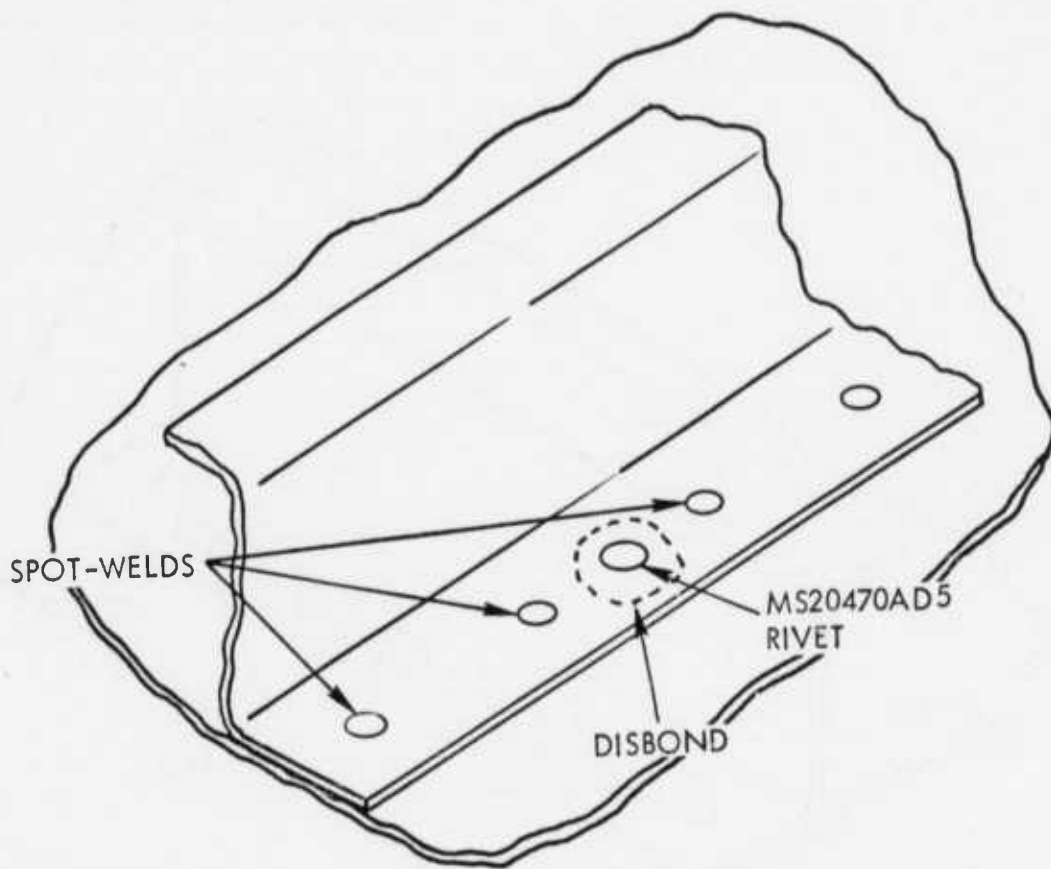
TYPICAL REPAIR FOR ADHESIVE DISBOND BETWEEN SPOT-WELDS
